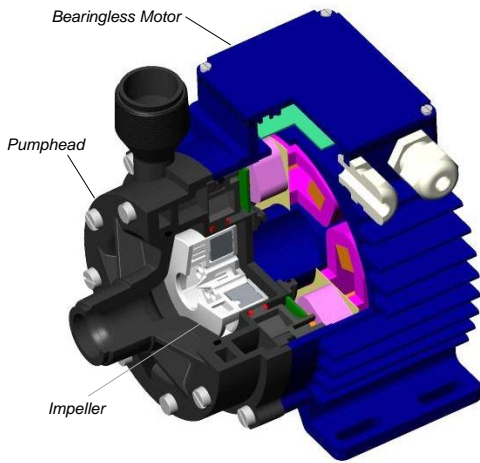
Cross-section of the bearingless pump motor and pump head LPP-600.5 (PP)
